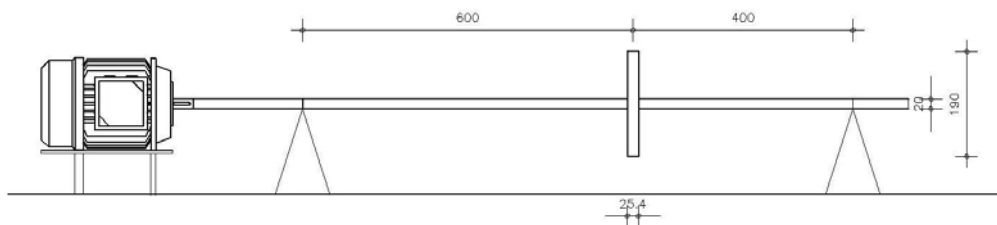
Simulated Jeffcott Rotor – dimensions in millimeters
